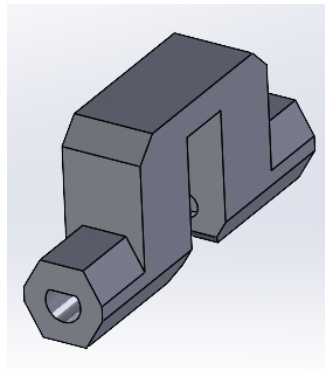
Pendulum Center Bracket in Proper 3D Printing position
